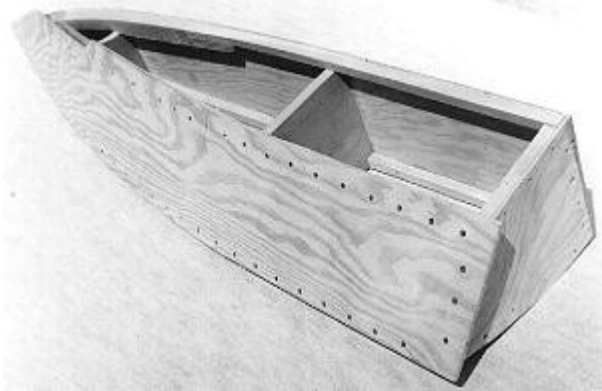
The RUNNER SIDE PLANKING #11 is fitted oversize as shown. The only area that must be fitted carefully now is that portion forward of FRAME #3 which will butt to the RUNNER BOTTOM #12.
